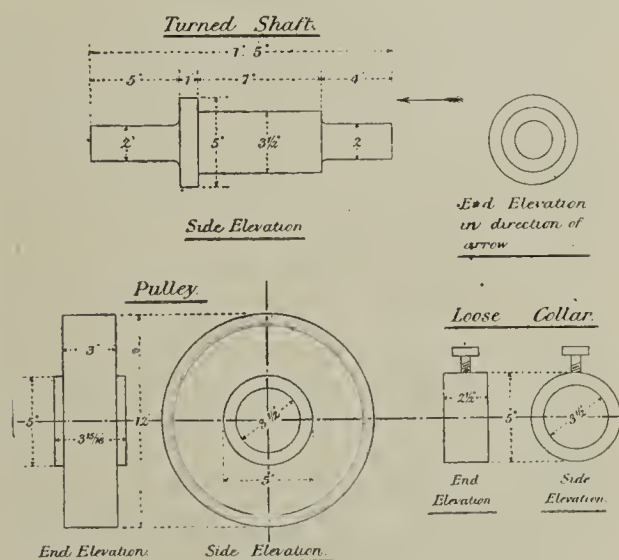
SUBJECT NO. 4. MACHINERY.
